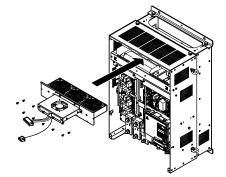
Install the Cooling Fan Unit: 2A0343 and 2A0396
